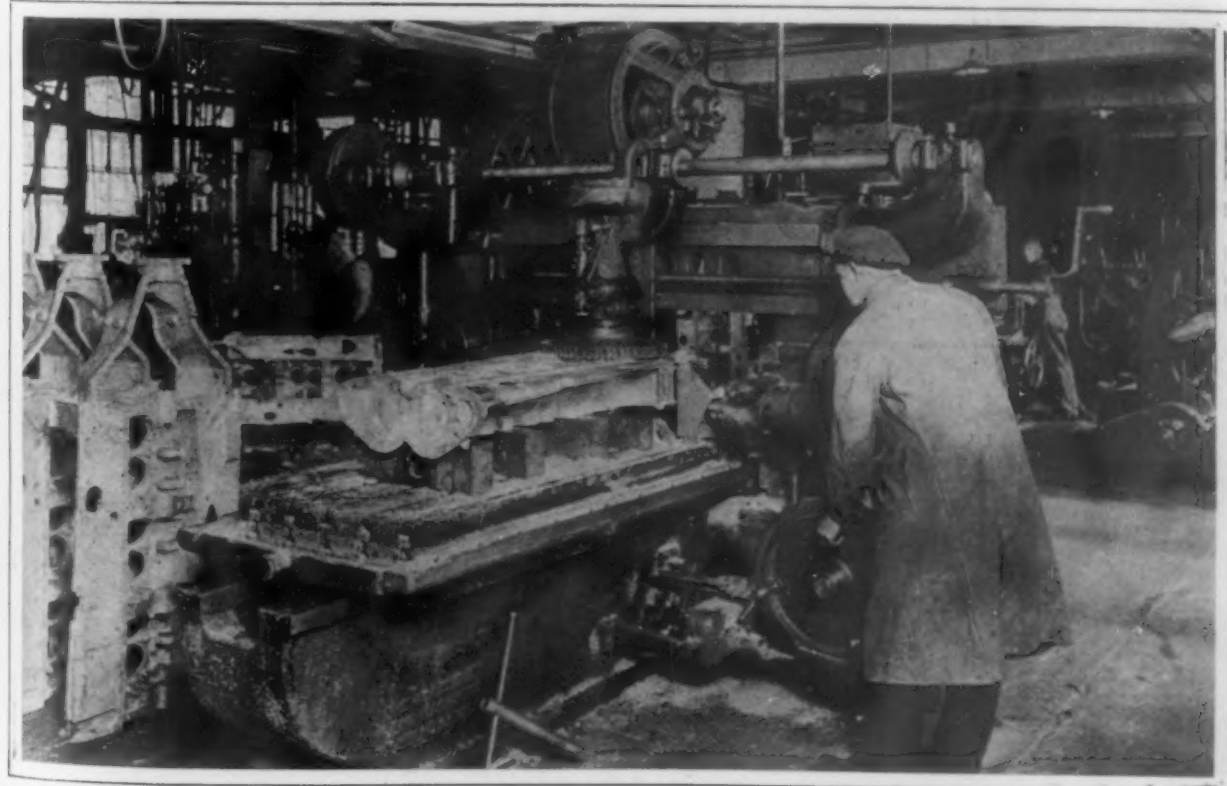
View of a Planer Type of Ingersoll Milling Machine Equipped with a 25-In. Cutter on the Vertical Spindle Sweeping the Bottom Face of a Six-Cylinder Crank Case
